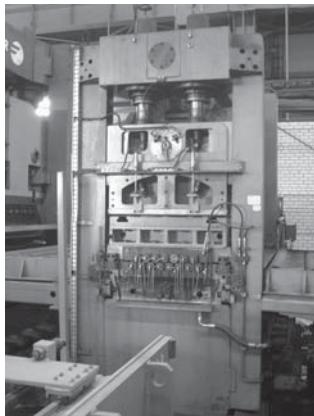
The multi-roller straightening machine by Fagor Arrasate
